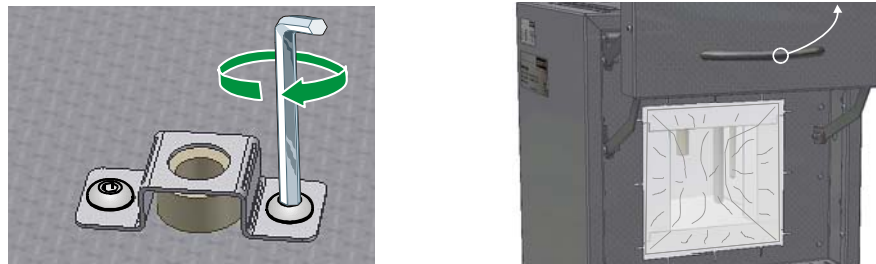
Assemble the protective metal sheet of the exhaust air tube with the screws that you previously unscrewed.
